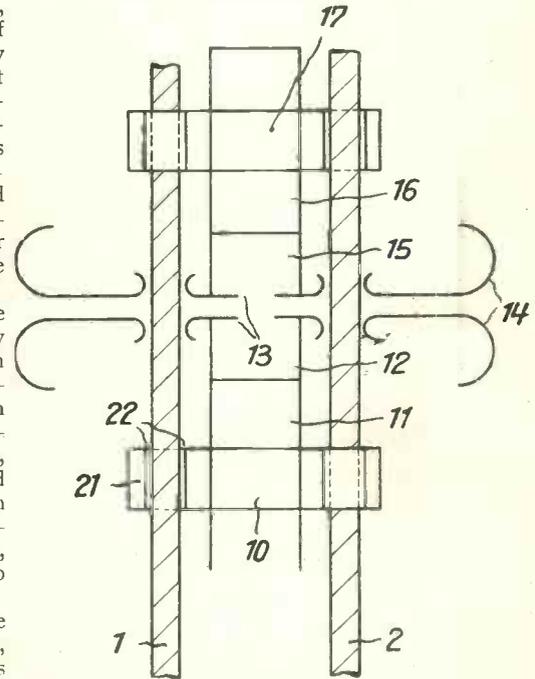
Diagram showing how the cylinder is assembled in two parts.
